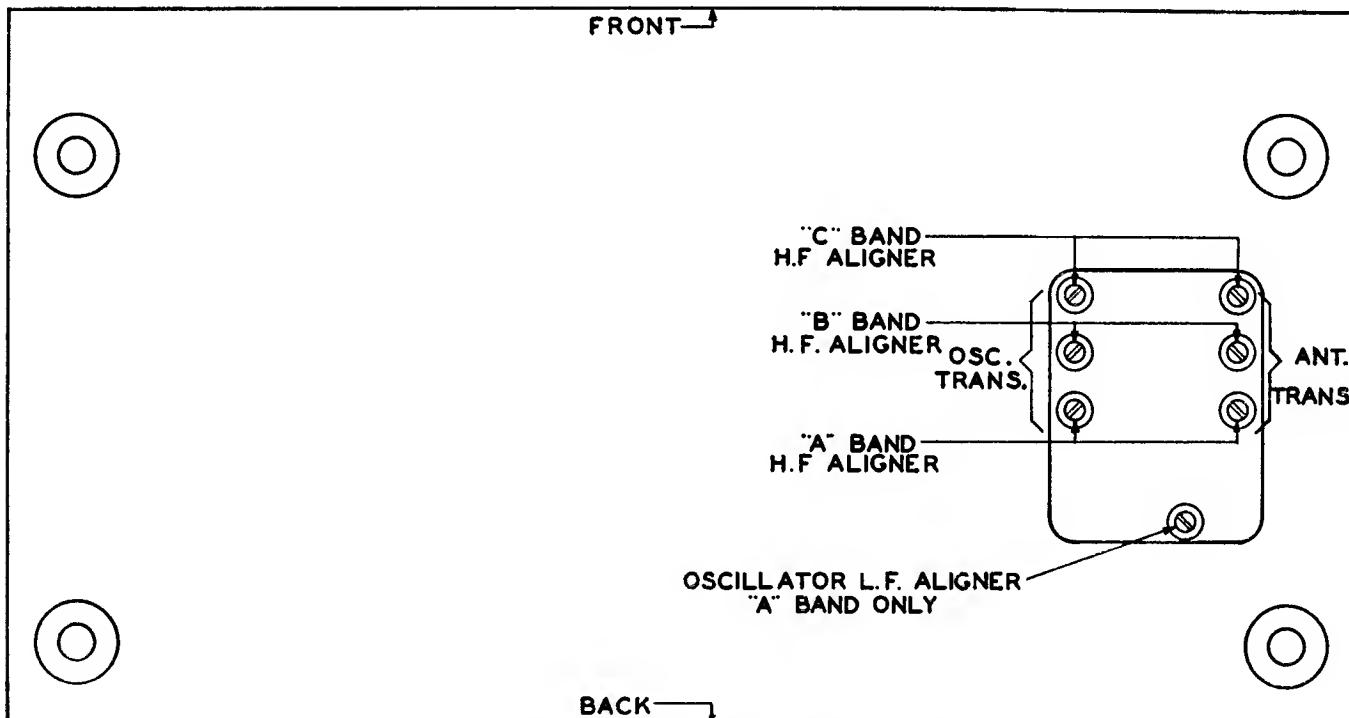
View Through Chassis Mounting Shelf Showing Adjusting Screws for R. F. Aligning Capacitors.
